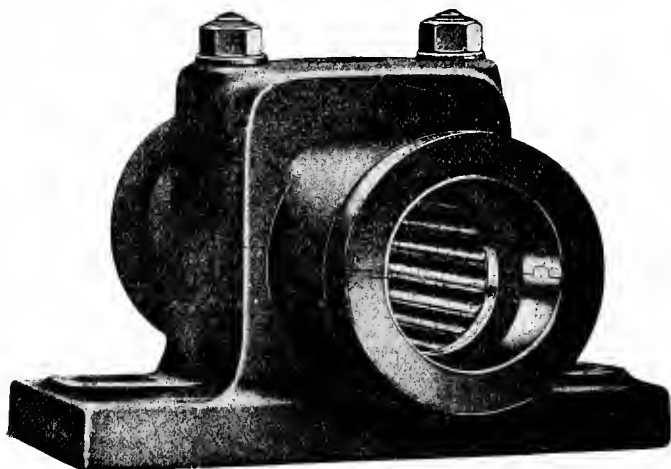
COMPLETE KYNOCH ROLLER BEARING AND PLUMMER BLOCK.
